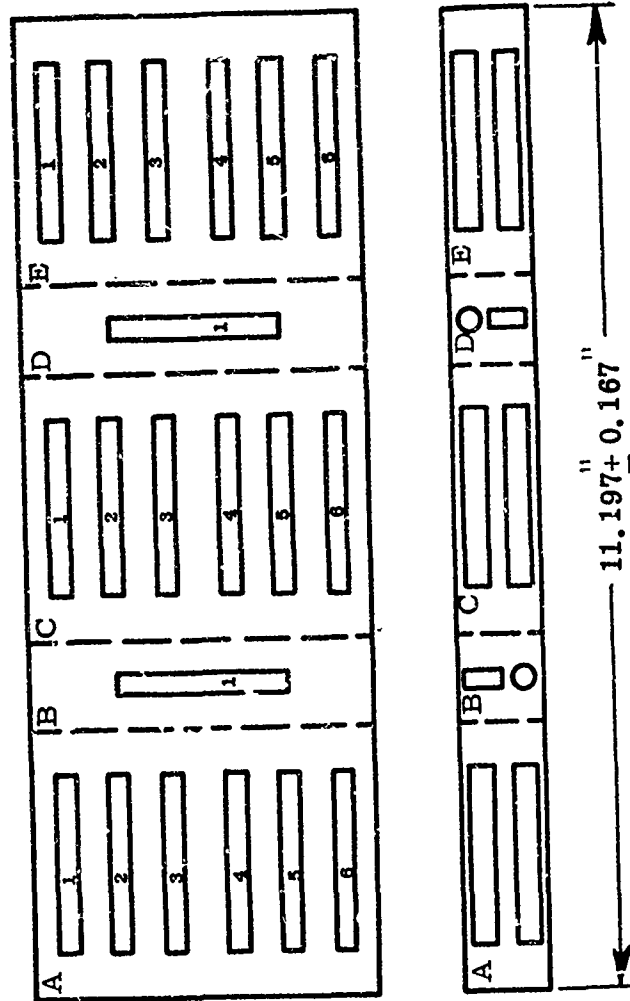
Configuration of Specimen Blank 1831-A-11 as received from Coors and Cutting Plan for Removing Phase I Macro Tensile and Macro Flexural Specimens
